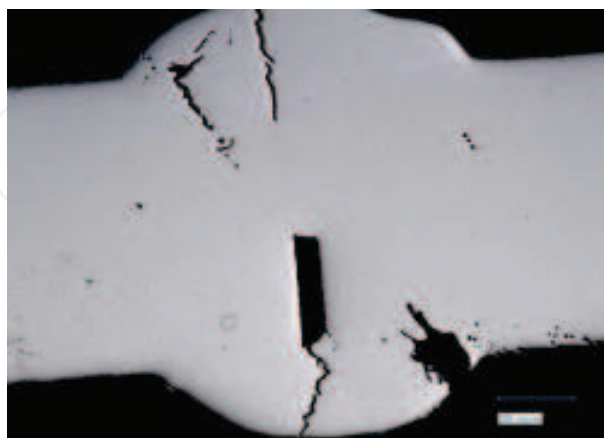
Sample of laser welding by Fidelis with filler observed by optical microscope.
